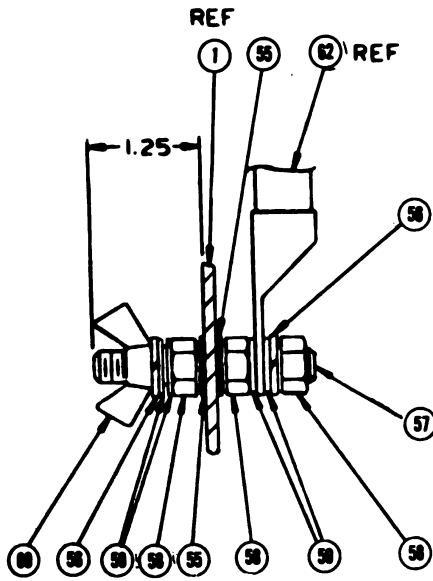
Switchbox Assembly (Sheet 4 of 7)
